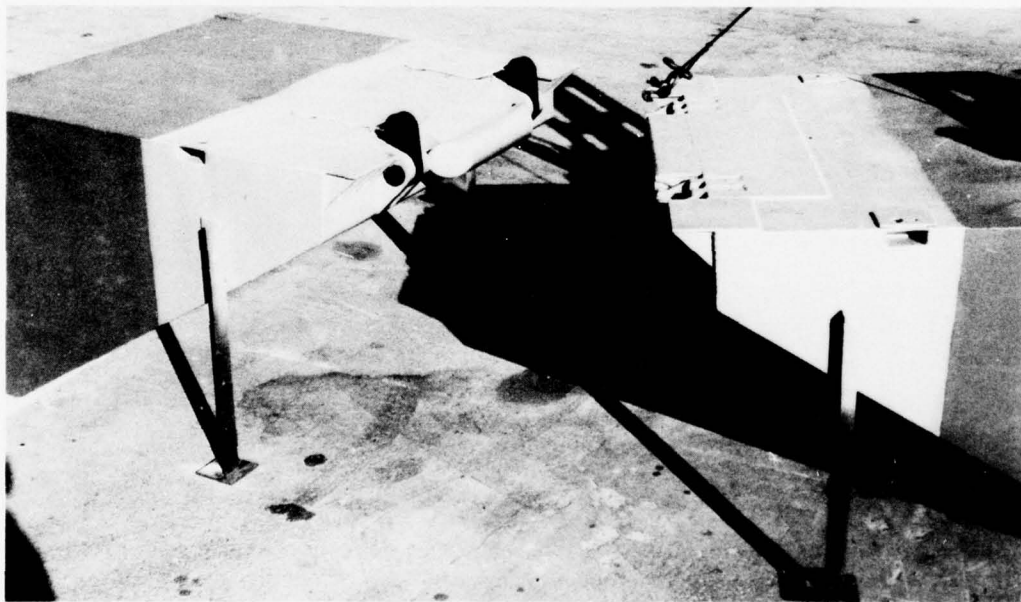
Improved NL pontoon end connectors. The connector was strengthened and padeye/link tolerances corrected to prevent links from popping out during operations.
